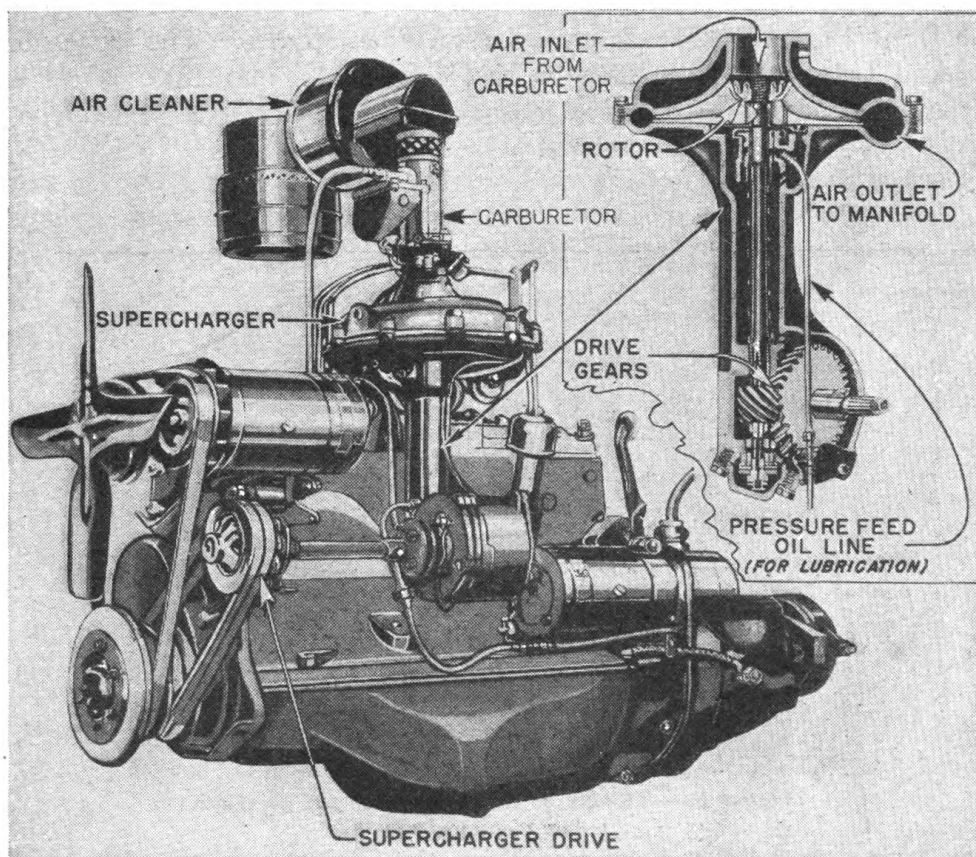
Supercharger showing drive mechanism and method of lubrication.
